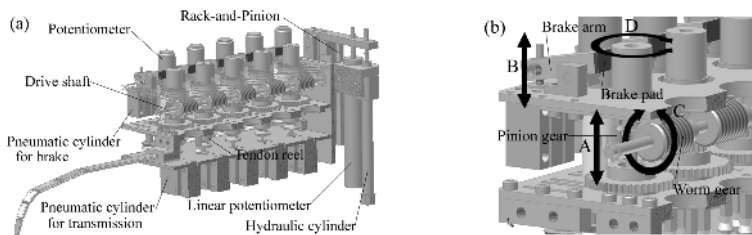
Tendon-driven unit; (a) Section drawing of the unit. (b) Enlarged drawing of the unit
